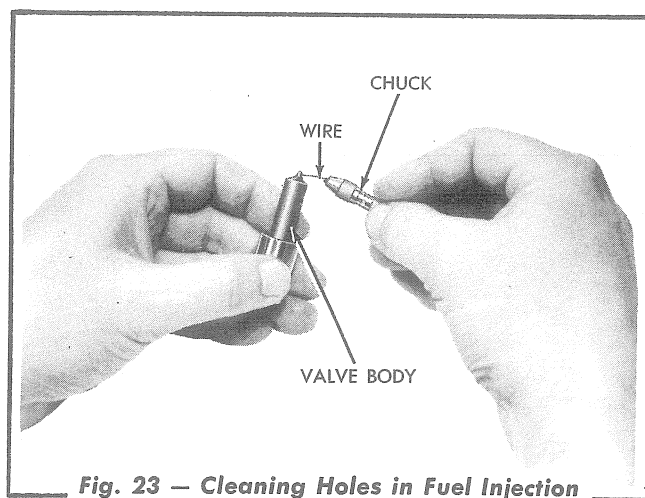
Cleaning Holes in Fuel Injection Nozzle Tip (Tractors Serial No. 4001)
